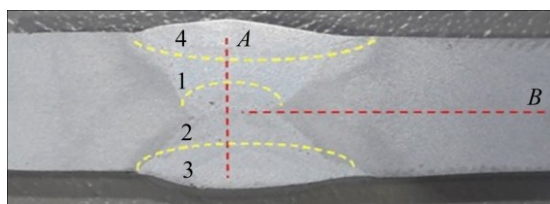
Macrograph of weldment in as-welded condition
